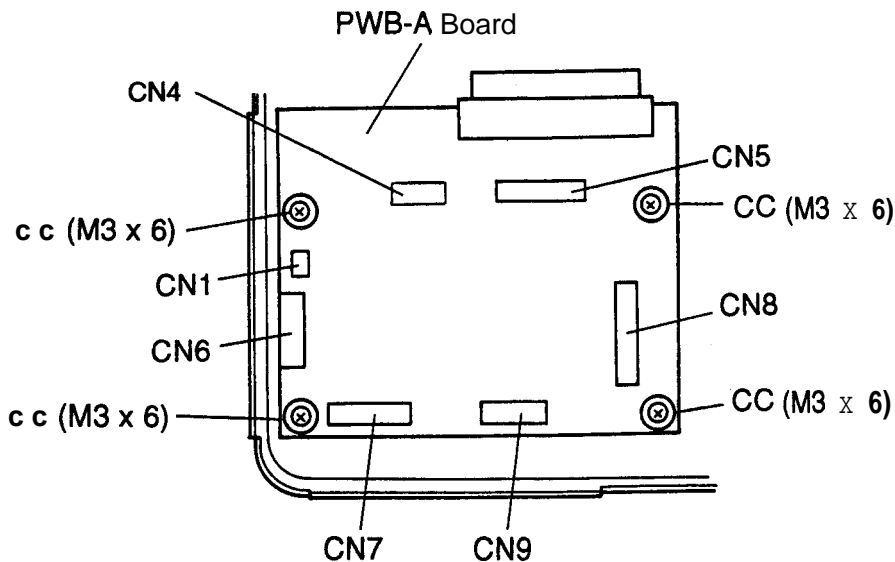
Removing the Engine Controller Board (PWB-A)
